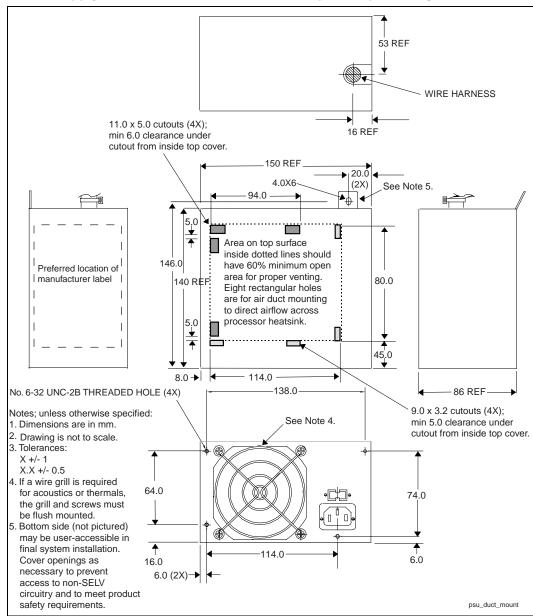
Power Supply Dimensions for Chassis that Require Top Venting
